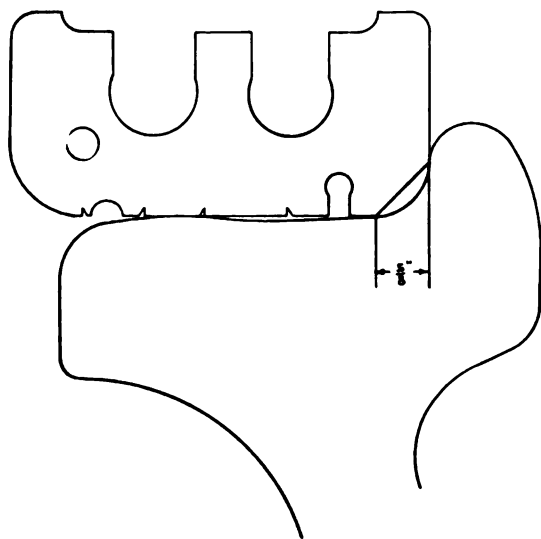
A—Method of gaging brake burn transverse cracks extending into the throat of the flange of a cast iron wheel. See Rule 75
